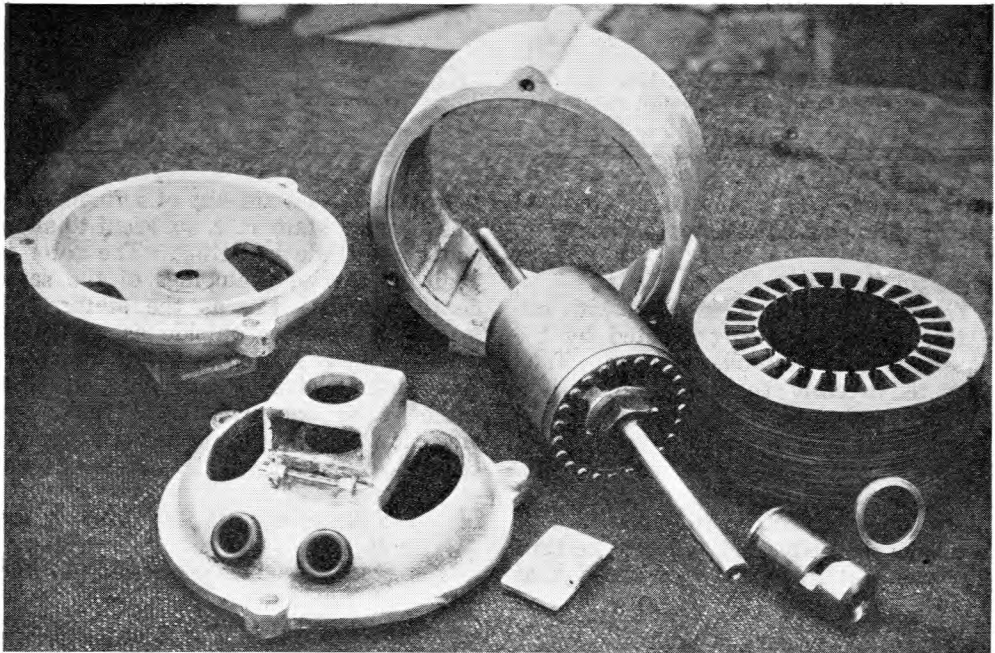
A VIEW OF THE COMPONENT PARTS REQUIRED FOR THE  $\frac{1}{8}$  H.P. INDUCTION MOTOR.
